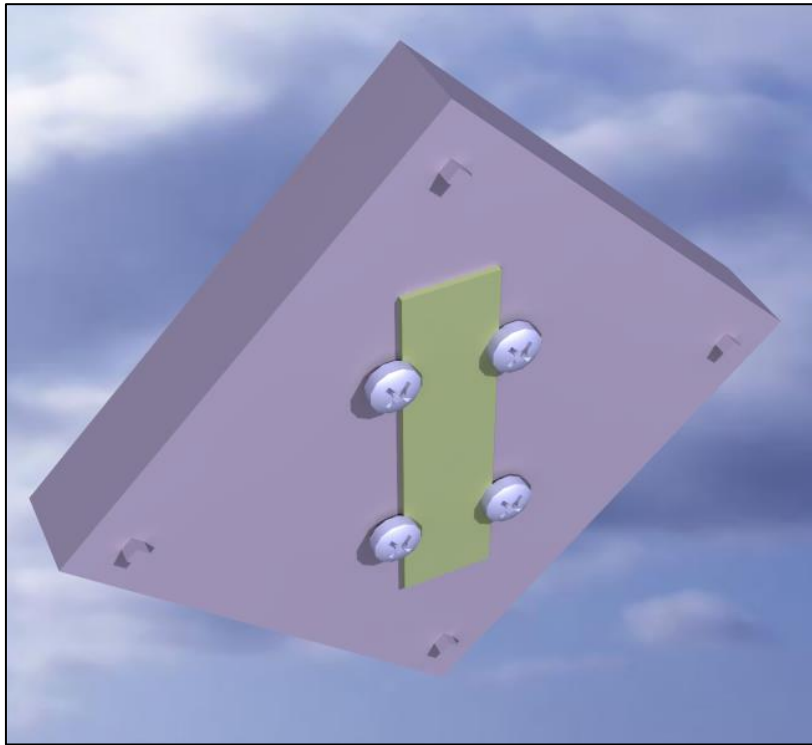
Almen strip fixed to the holed lid (internal view)
